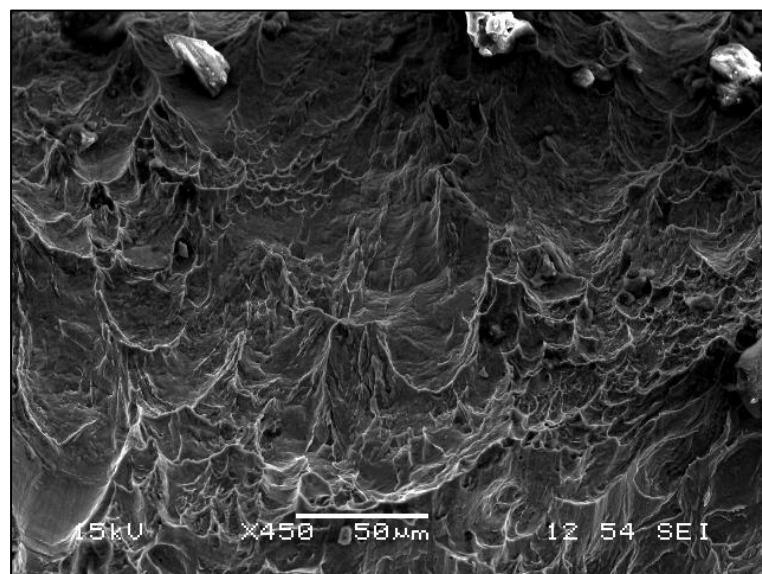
Charpy impact surface of laser-mechanically formed specimen
